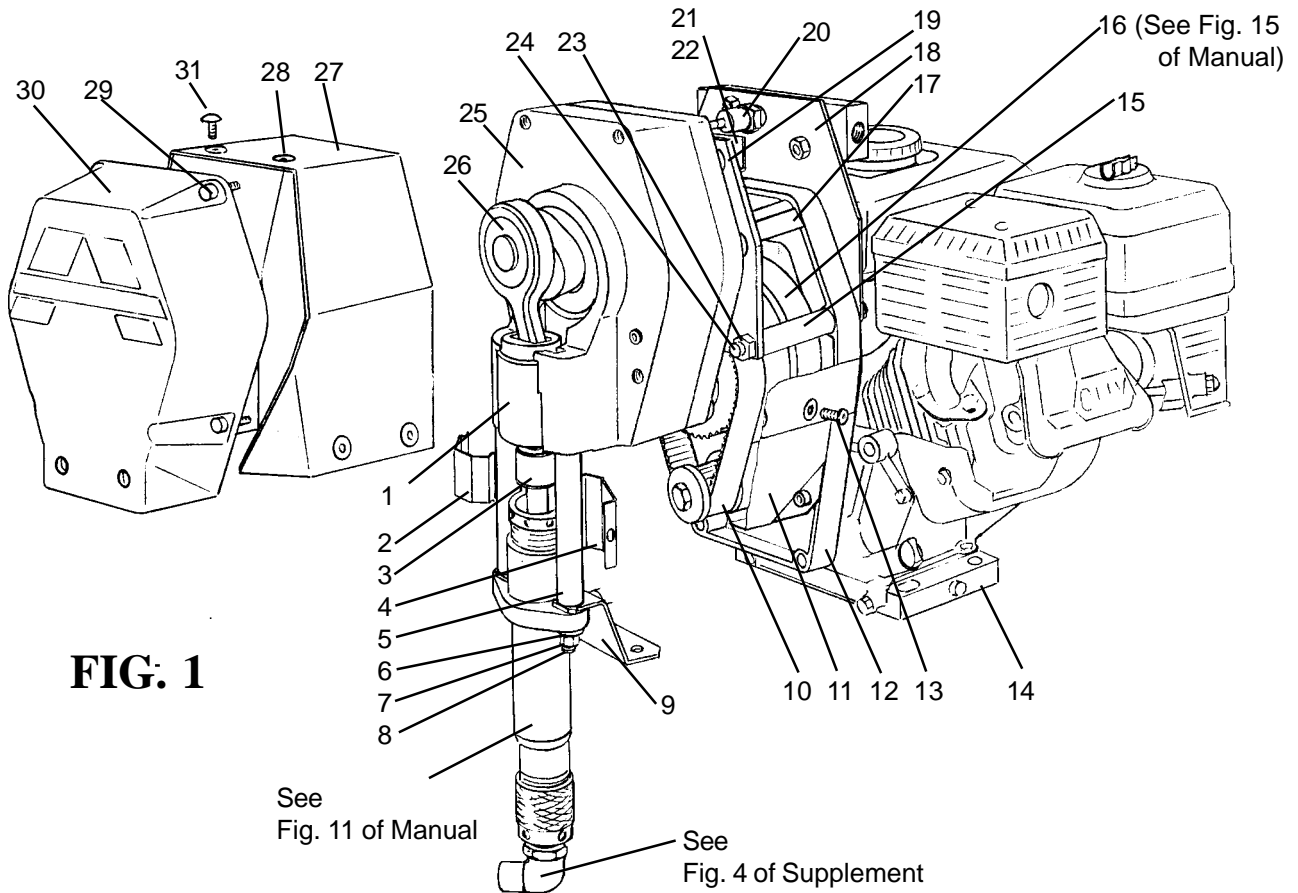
PARTS LIST, POWER UNIT ASSEMBLY, PN 305-010
